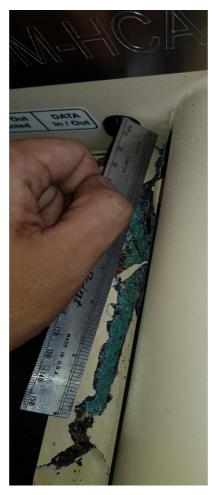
shows the crack on the Right-hand side of lower fuselage looking from aft of the aircraft. Measurement of the crack spanwise is at 7 inches.
